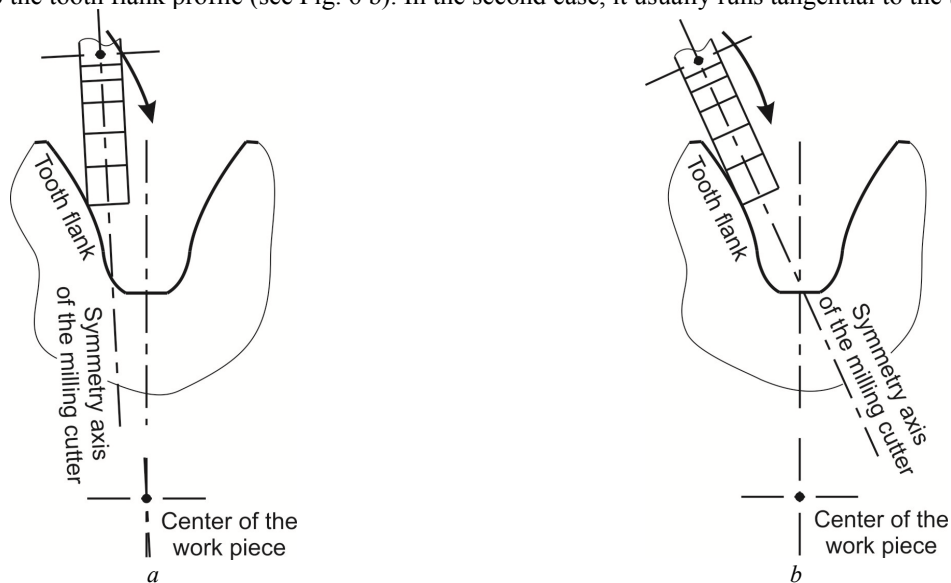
Strategies for tool engagement when machining the tooth flanks
